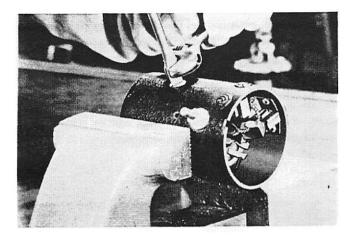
Removing Pole Shoes with Screwdriver and Adjustable Wrench
